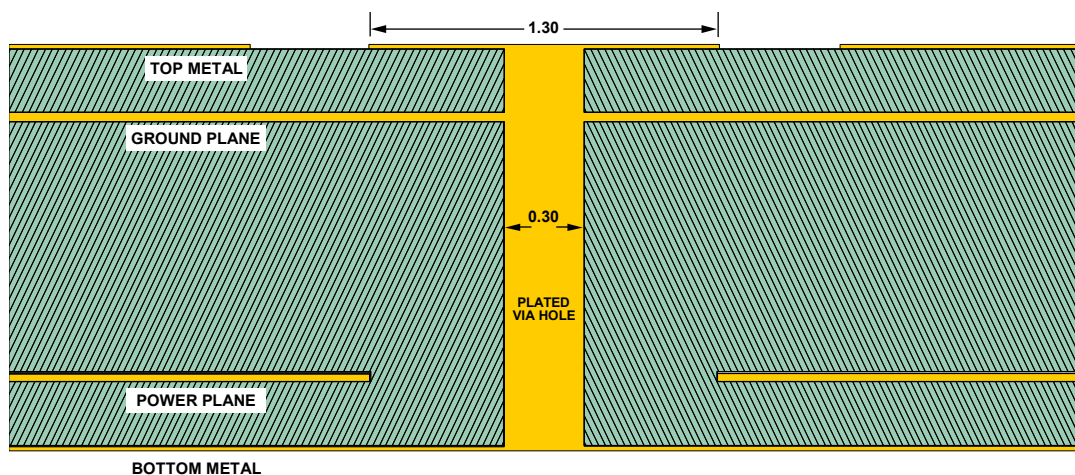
Cross-Section of 4-Layer PCB Showing Thermal Via Connection to Buried Ground Plane (Dimensions in Millimeters)
